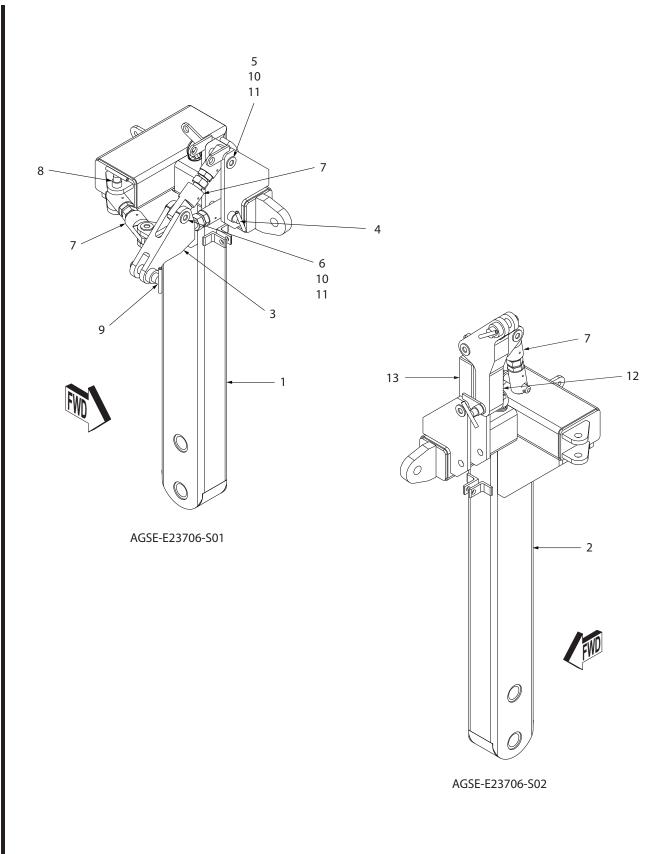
AGSE-E23706-S01/S02 AFT Post Assembly
